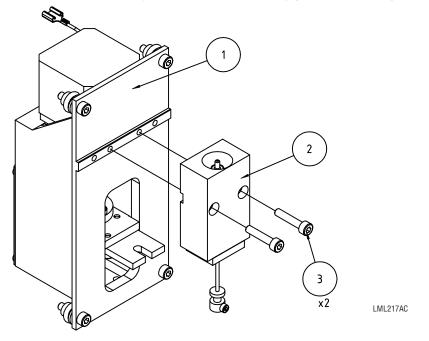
Sample Syringe and Motor Assembly (See Table 8.2-20)
